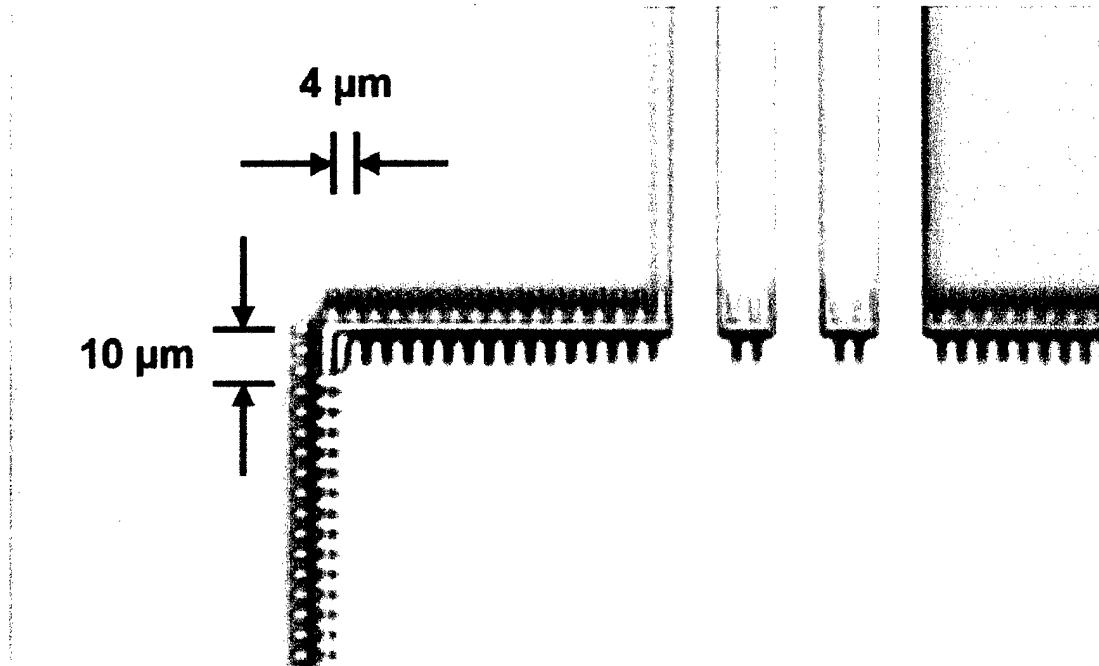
Photograph of bonded flip-chip pads showing extreme alignment error .
